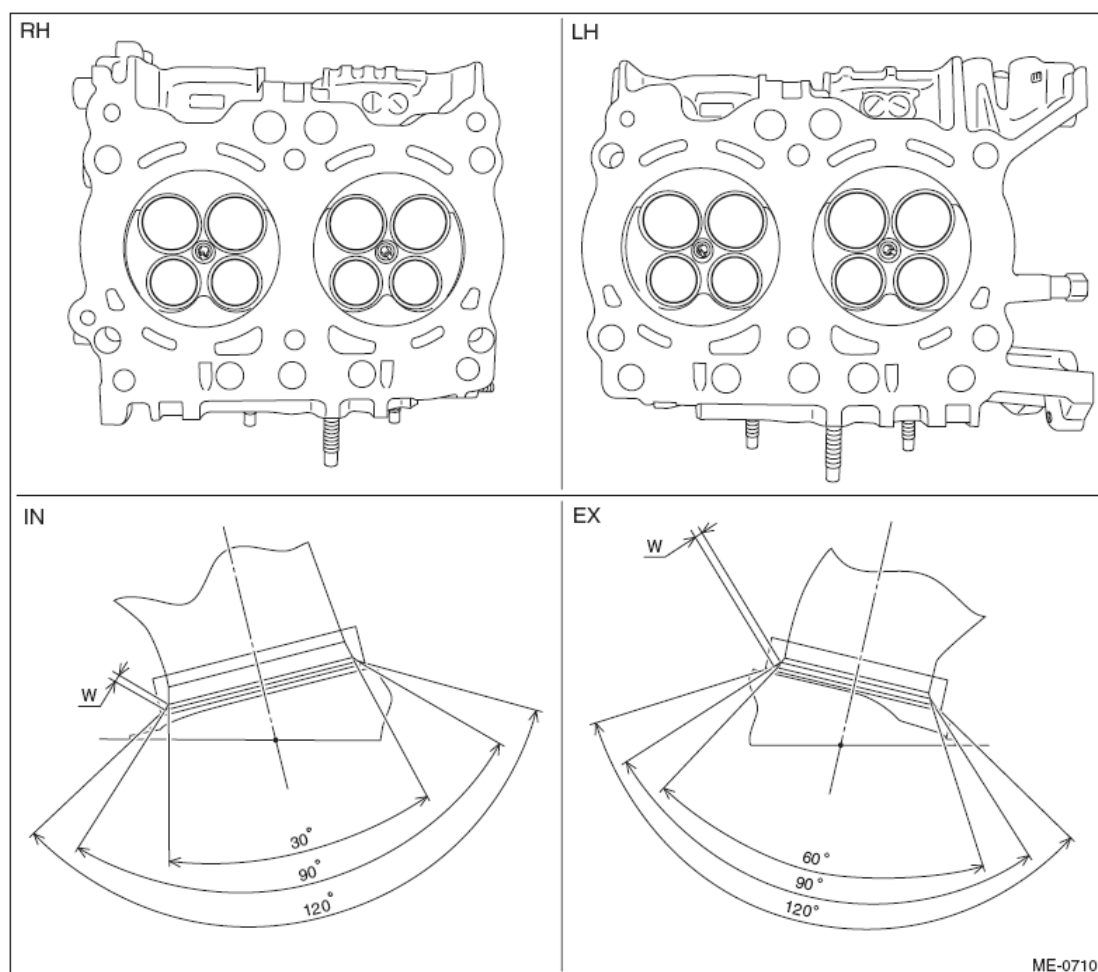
Identifying Seating Width Between Valve And Valve Seat
